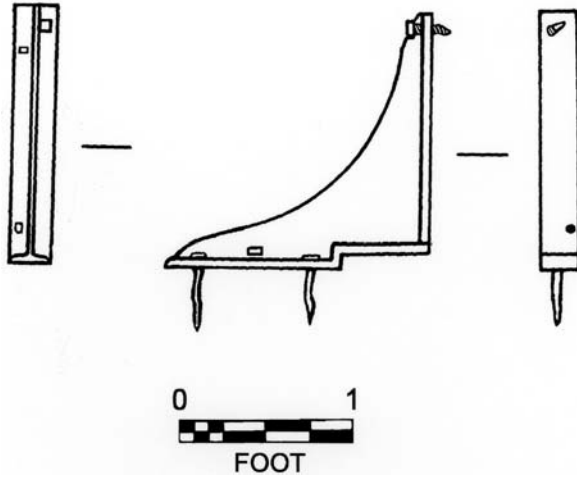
Side and end views of boiler saddle. Drawing by Jim Bradford
